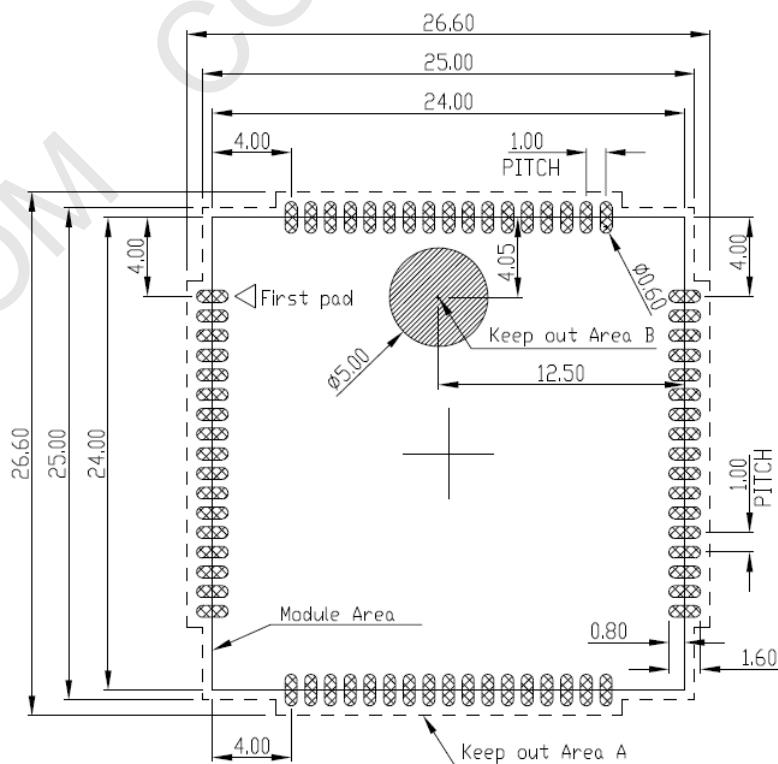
SIM800F Recommended PCB footprint outline (Unit: mm)
